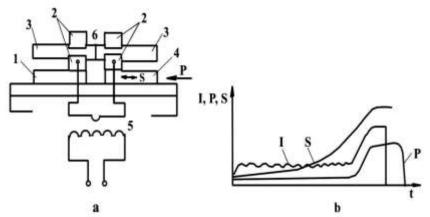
Scheme of flash welding (a) and welding cycle (b): 1 – immovable plate; 2 – clamp (electrode); 3 – work; 4 – movable plate; 5 – transformer; 6 – contact (weld); I – current; S – replacement of movable plate; P – pressure
